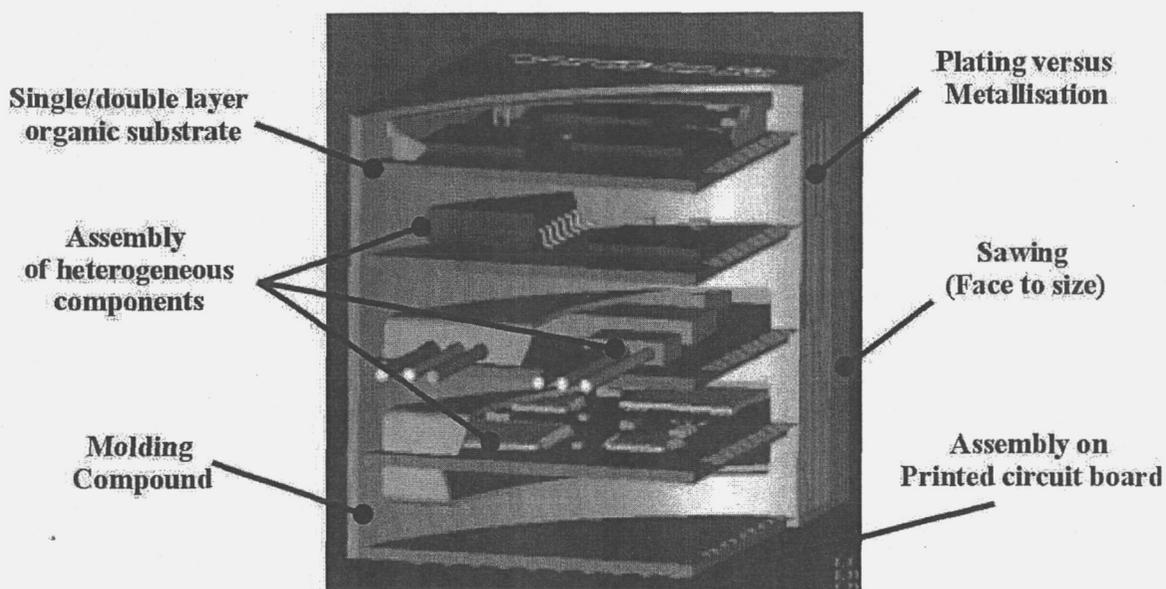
Illustration of 3-D Module Stacking. [Alexandre.pdf]
